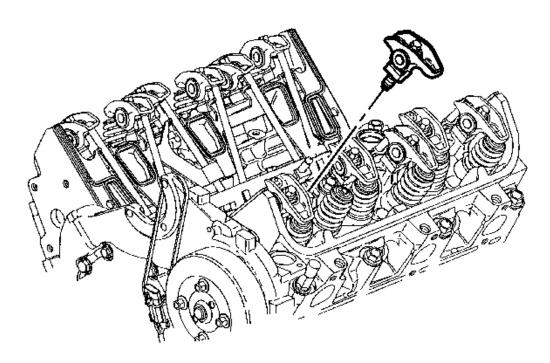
View Of Valve Rocker Arm Courtesy of GENERAL MOTORS CORP.
